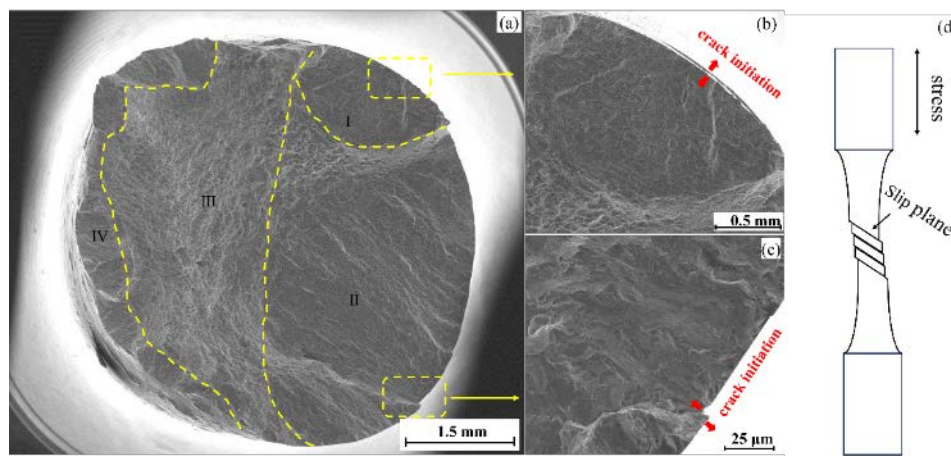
The macro fracture morphology (a); (b) and (c) are the location of the crack source; (d) is the schematic diagram of fatigue fracture.
